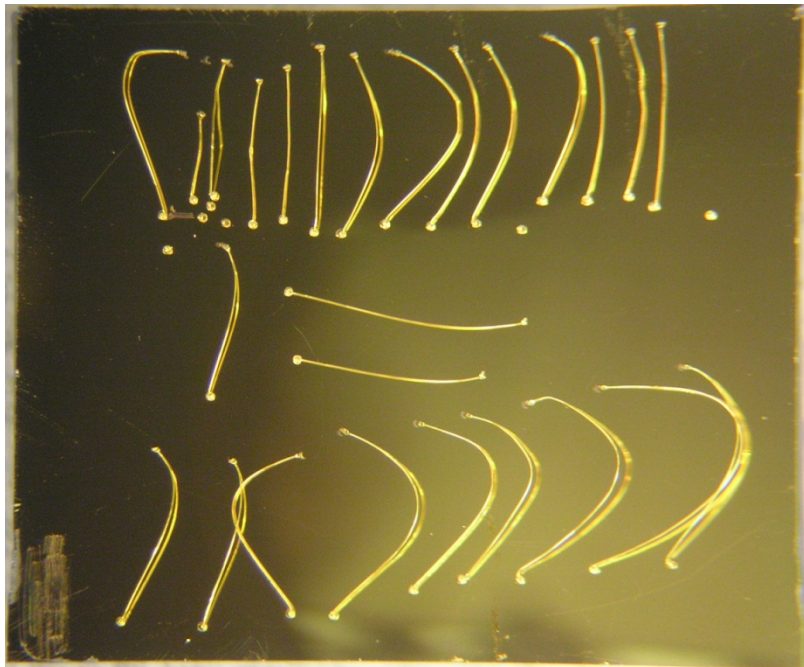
Gold coated silicon die with 26 wire bonds. The bare ball joints with no wires were due to tip blockage which is due to the aging tip and not a bond failure.
